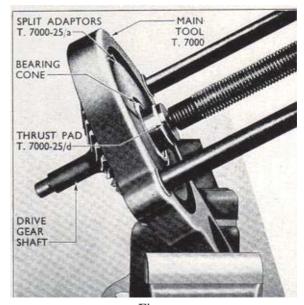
Removing the Large Bearing Cone from the Drive Gear Shaft
